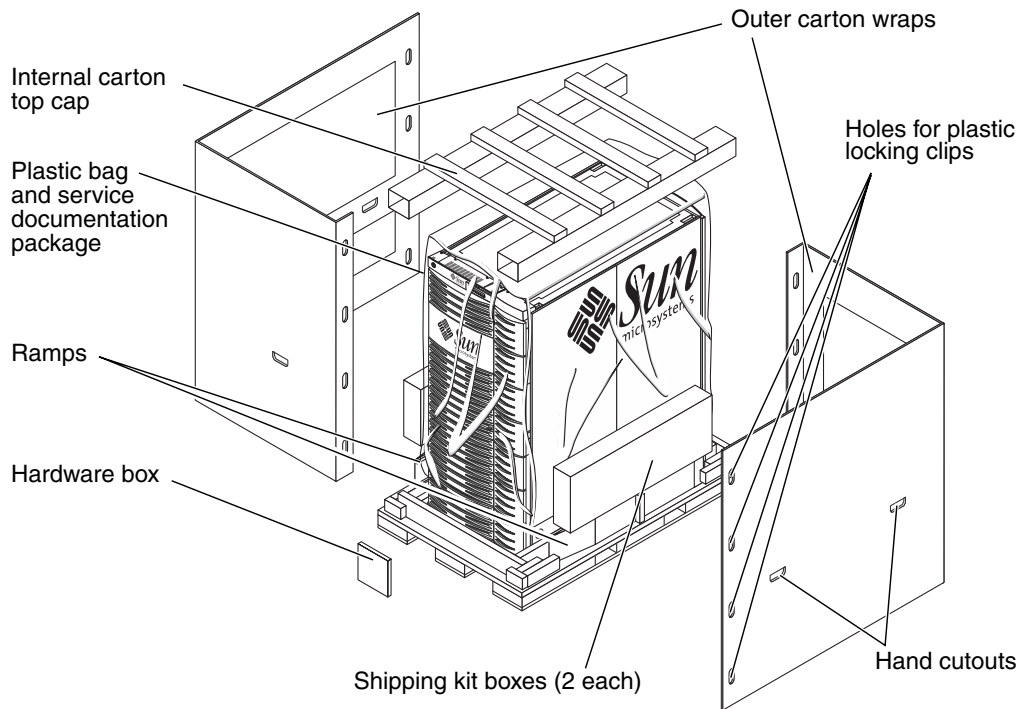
Final Packaging and Outside Carton Packaging Assemblies
